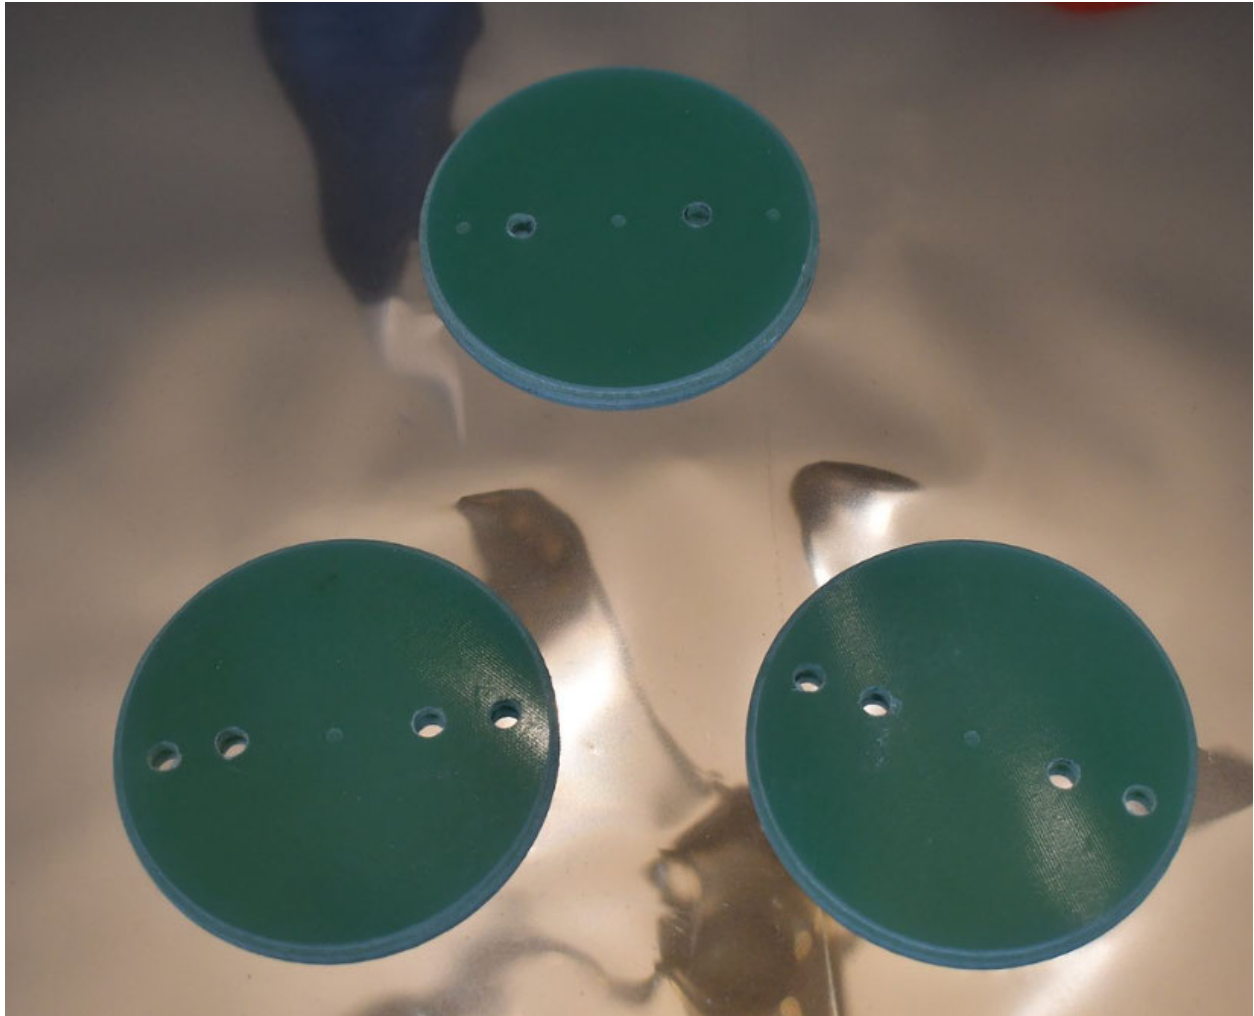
Centering rings with holes cut for u-bolts and threaded rods.
